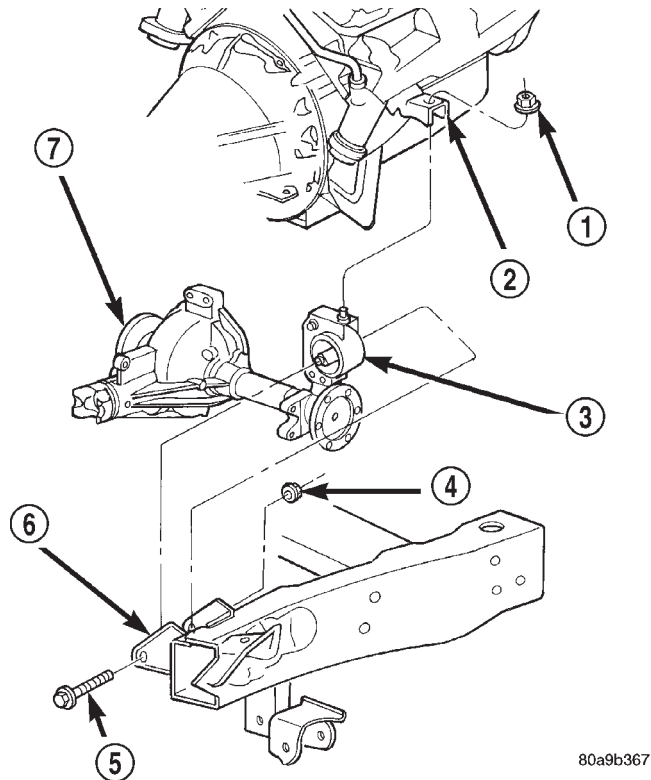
Engine Mount Insulator at Frame—4WD Vehicles
